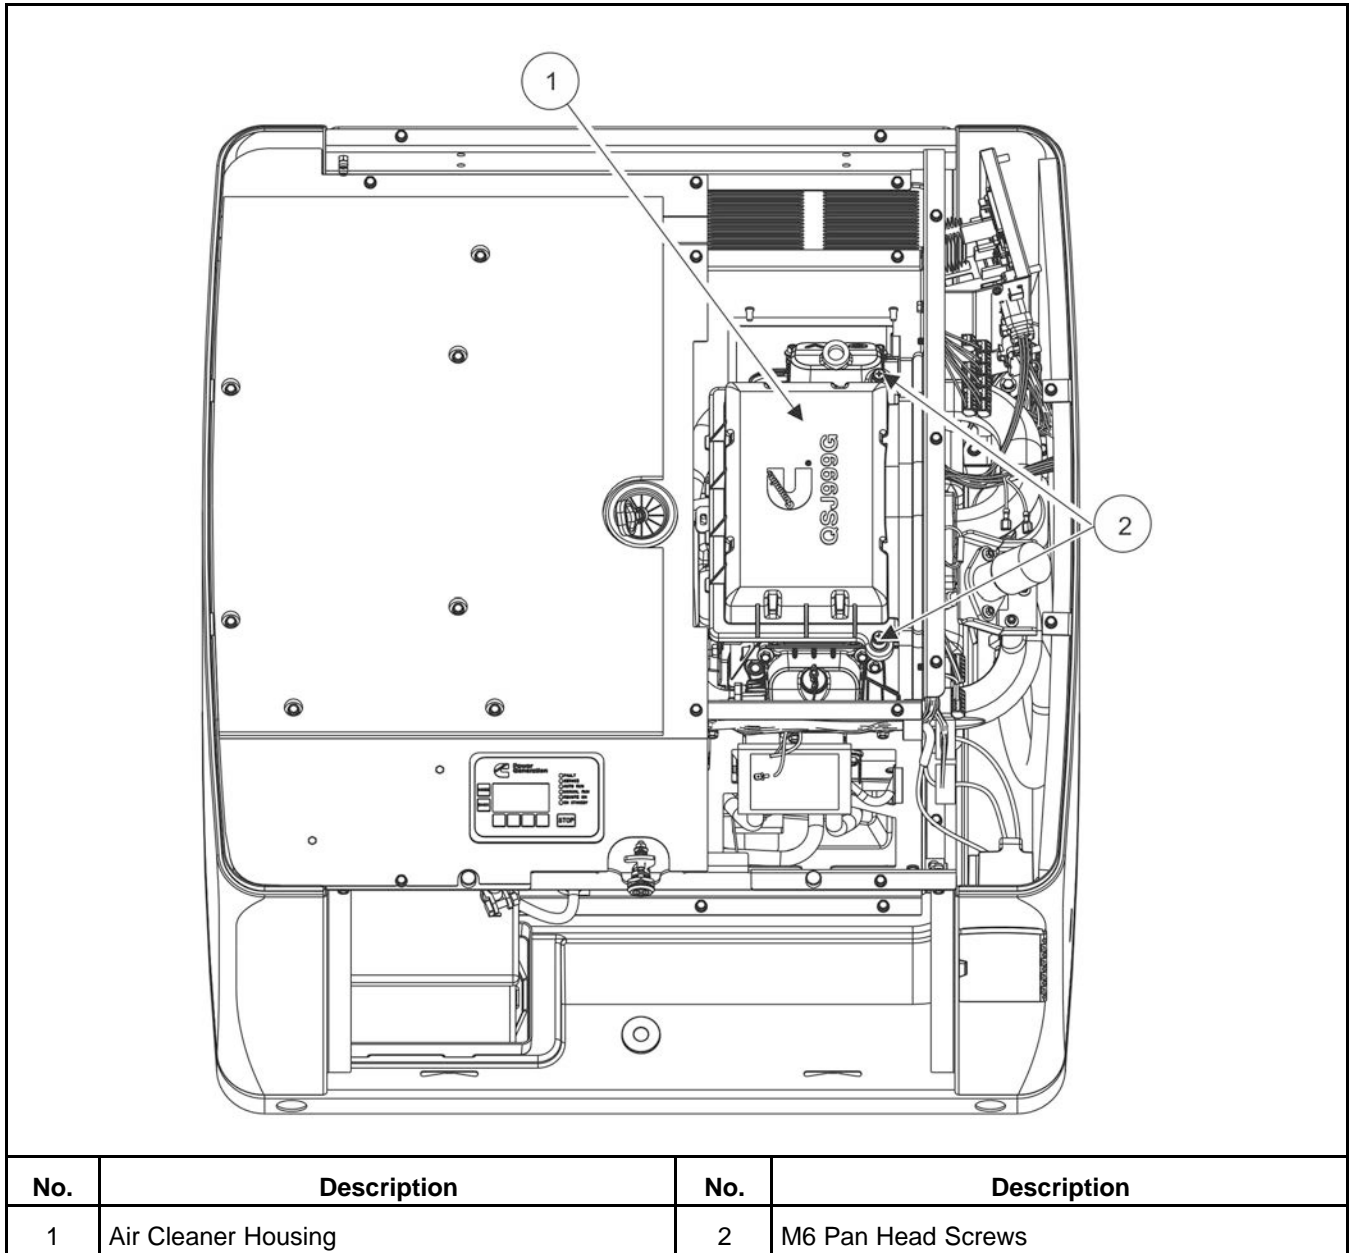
AIR CLEANER ELEMENT WITH PAN HEAD SCREWS
